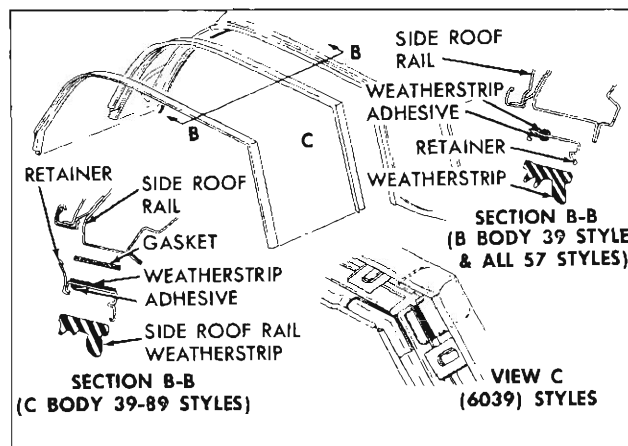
Side Roof Rail Weatherstrip Assembly—39 and 47 Styles
